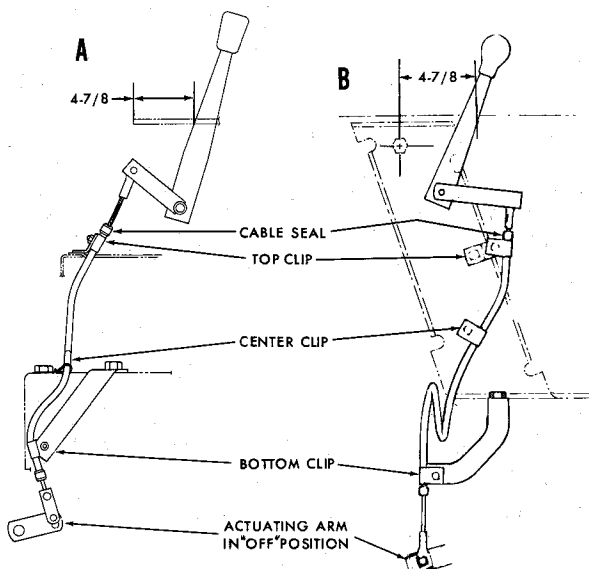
View showing adjustment points for pto control linkage. Models 8700 and 9700 are shown in View "A" while 8000—9000—8600—9600 models are shown in View "B". Refer to text for procedure. See Fig. 191 for pto adjustment on Models TW-10, TW-20 and TW-30.
